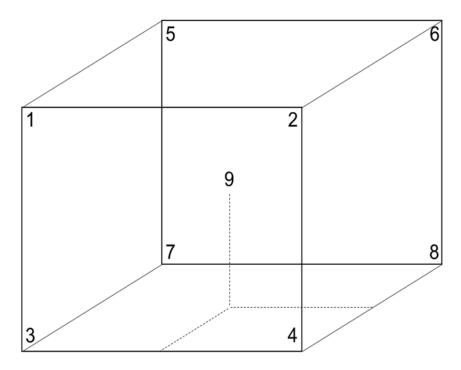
Thermocouple Locations—Rectangular Furnace (Working Zone)
